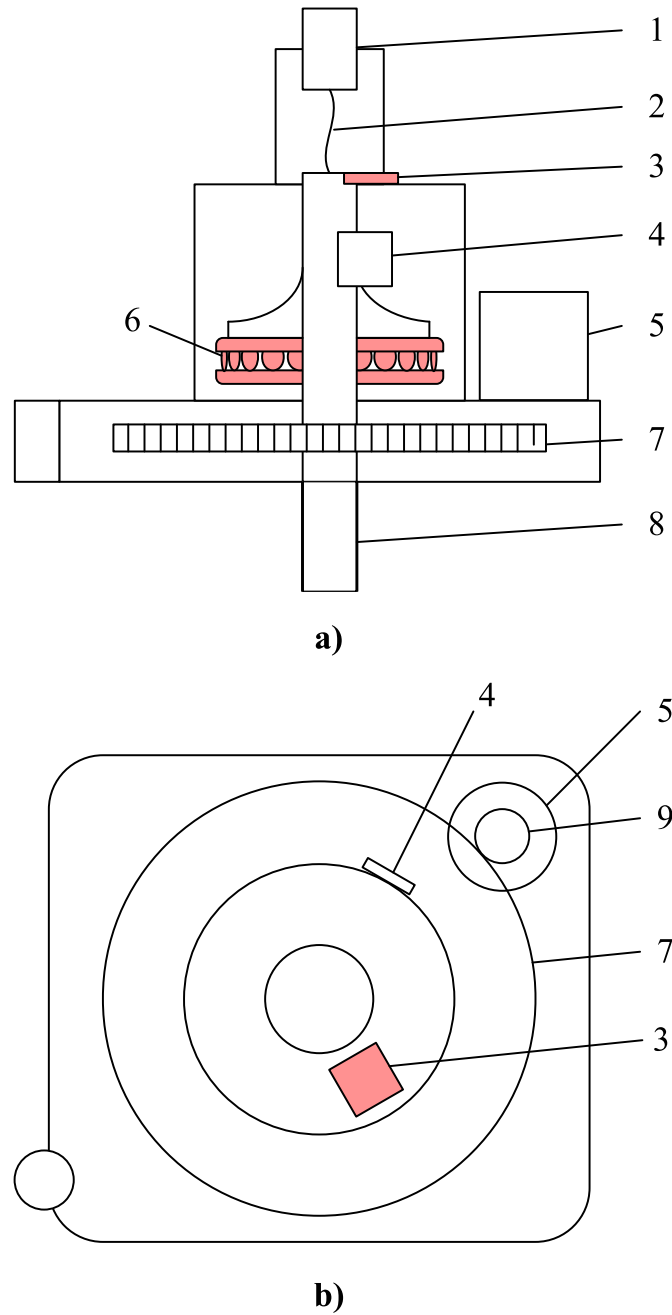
Conceptual drawing of an offshore drilling machine. a) Side view b) Top view. 1: Encoder 2: Flexible coupling 3: Axial sensor placement 4: Radial sensor placement, 5: Motor, 6: Axial bearing, 7: Gear, 8: Shaft, 9: Pinion.
